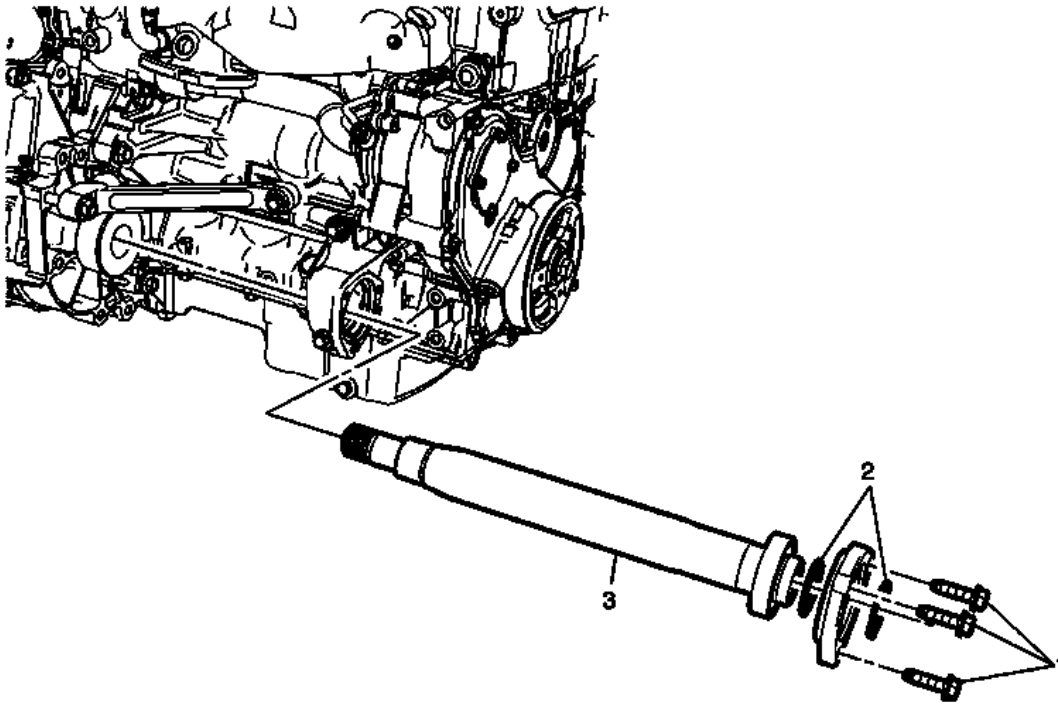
Front Wheel Drive Intermediate Shaft & Components (with MHH, MHK or MDK)
